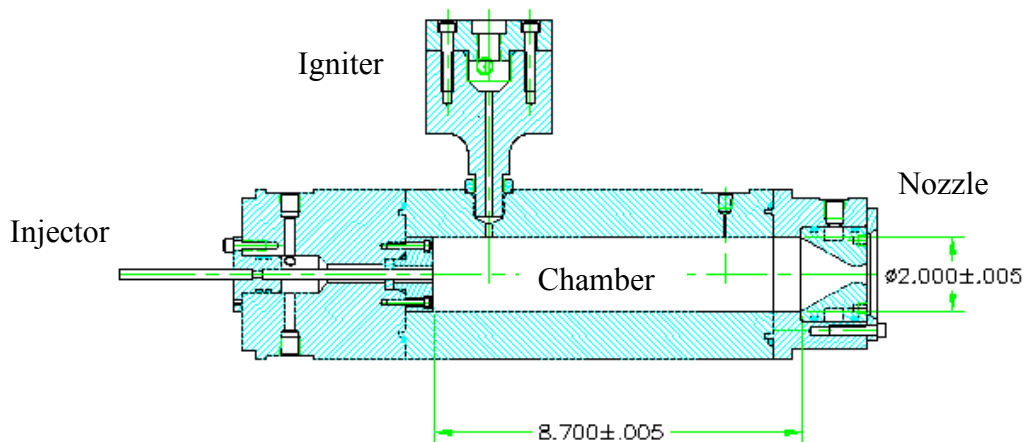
MTTP ROCKET SHOWING CHAMBER DIMENSIONS
